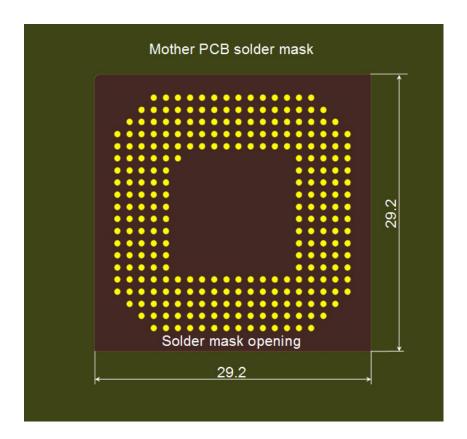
, Ø 0.63 mm solder lands with one large solder mask opening extending at least 50 μm outside the package outline on all four sides
